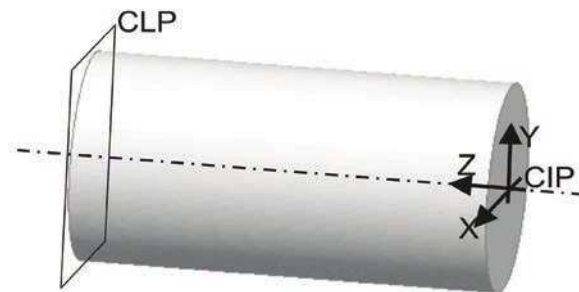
Centre cutting end mill: Revolved body of cutting part
